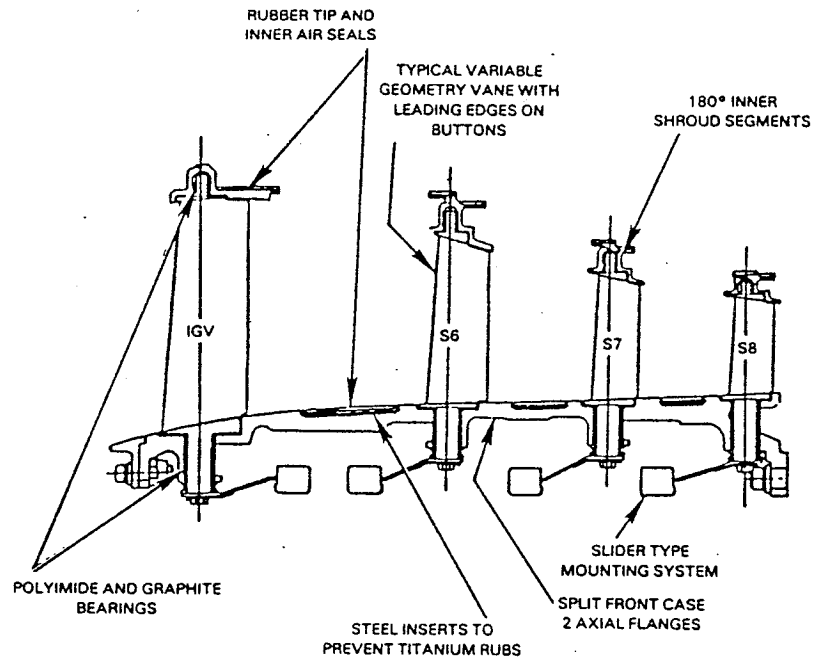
High-Pressure Compressor Front Case and Stator Assembly
